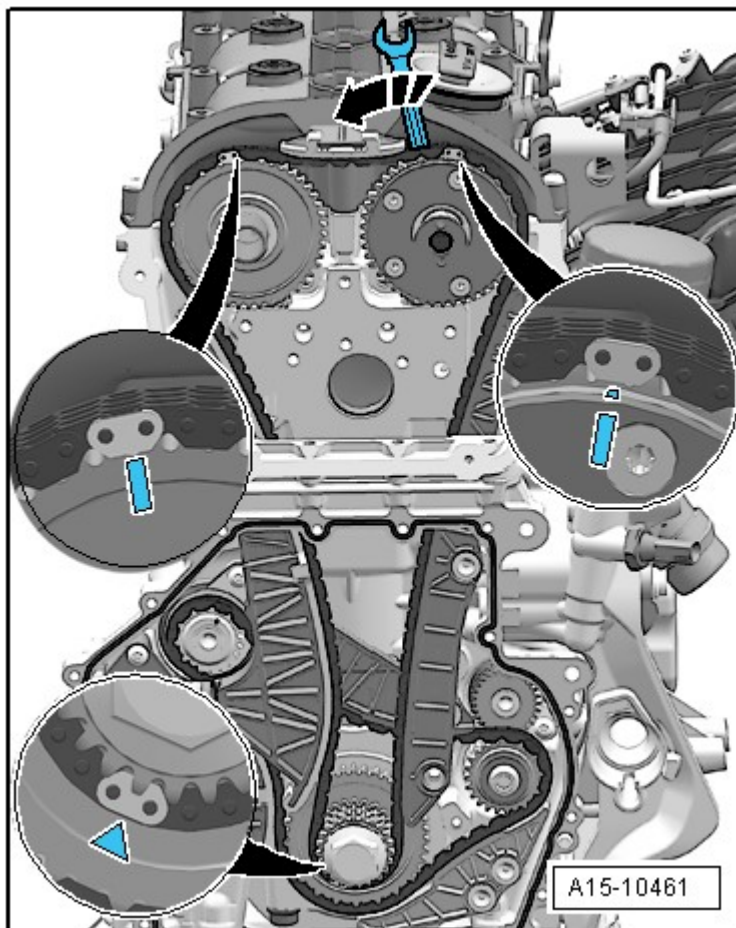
Identifying Intake Camshaft Turned Using Wrench
